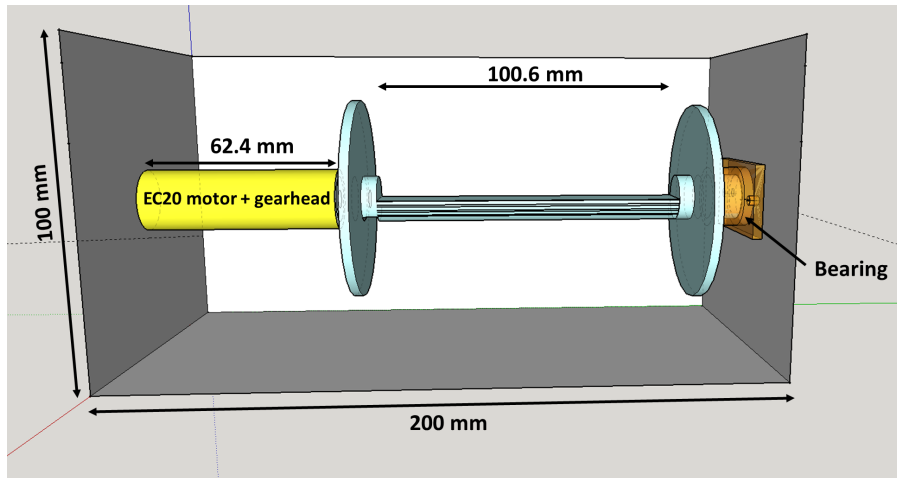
EC20 Maxon motor plus a gearhead is mounted to the solar sail roll spindle and the opposite side is a bearing. The EC20 Maxon motor plus a gearhead was chosen for this application because it can deliver required torque and its weight is lower than requirement. The spindle diameter is 80 mm.
